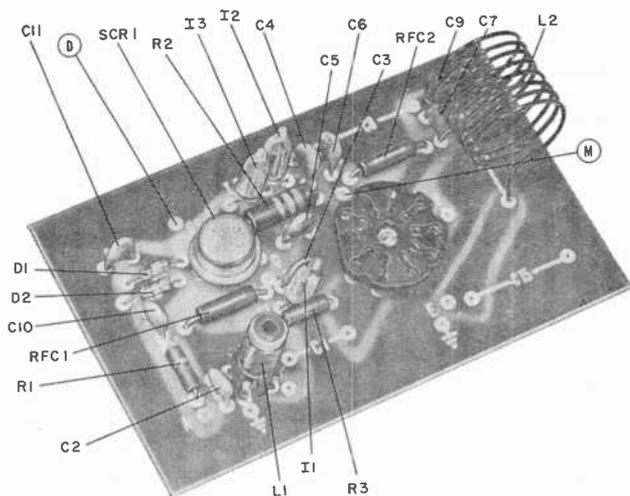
Except for the necessary inter-unit wiring, the printed circuit board must be fully assembled as shown here before it is installed on the chassis.
